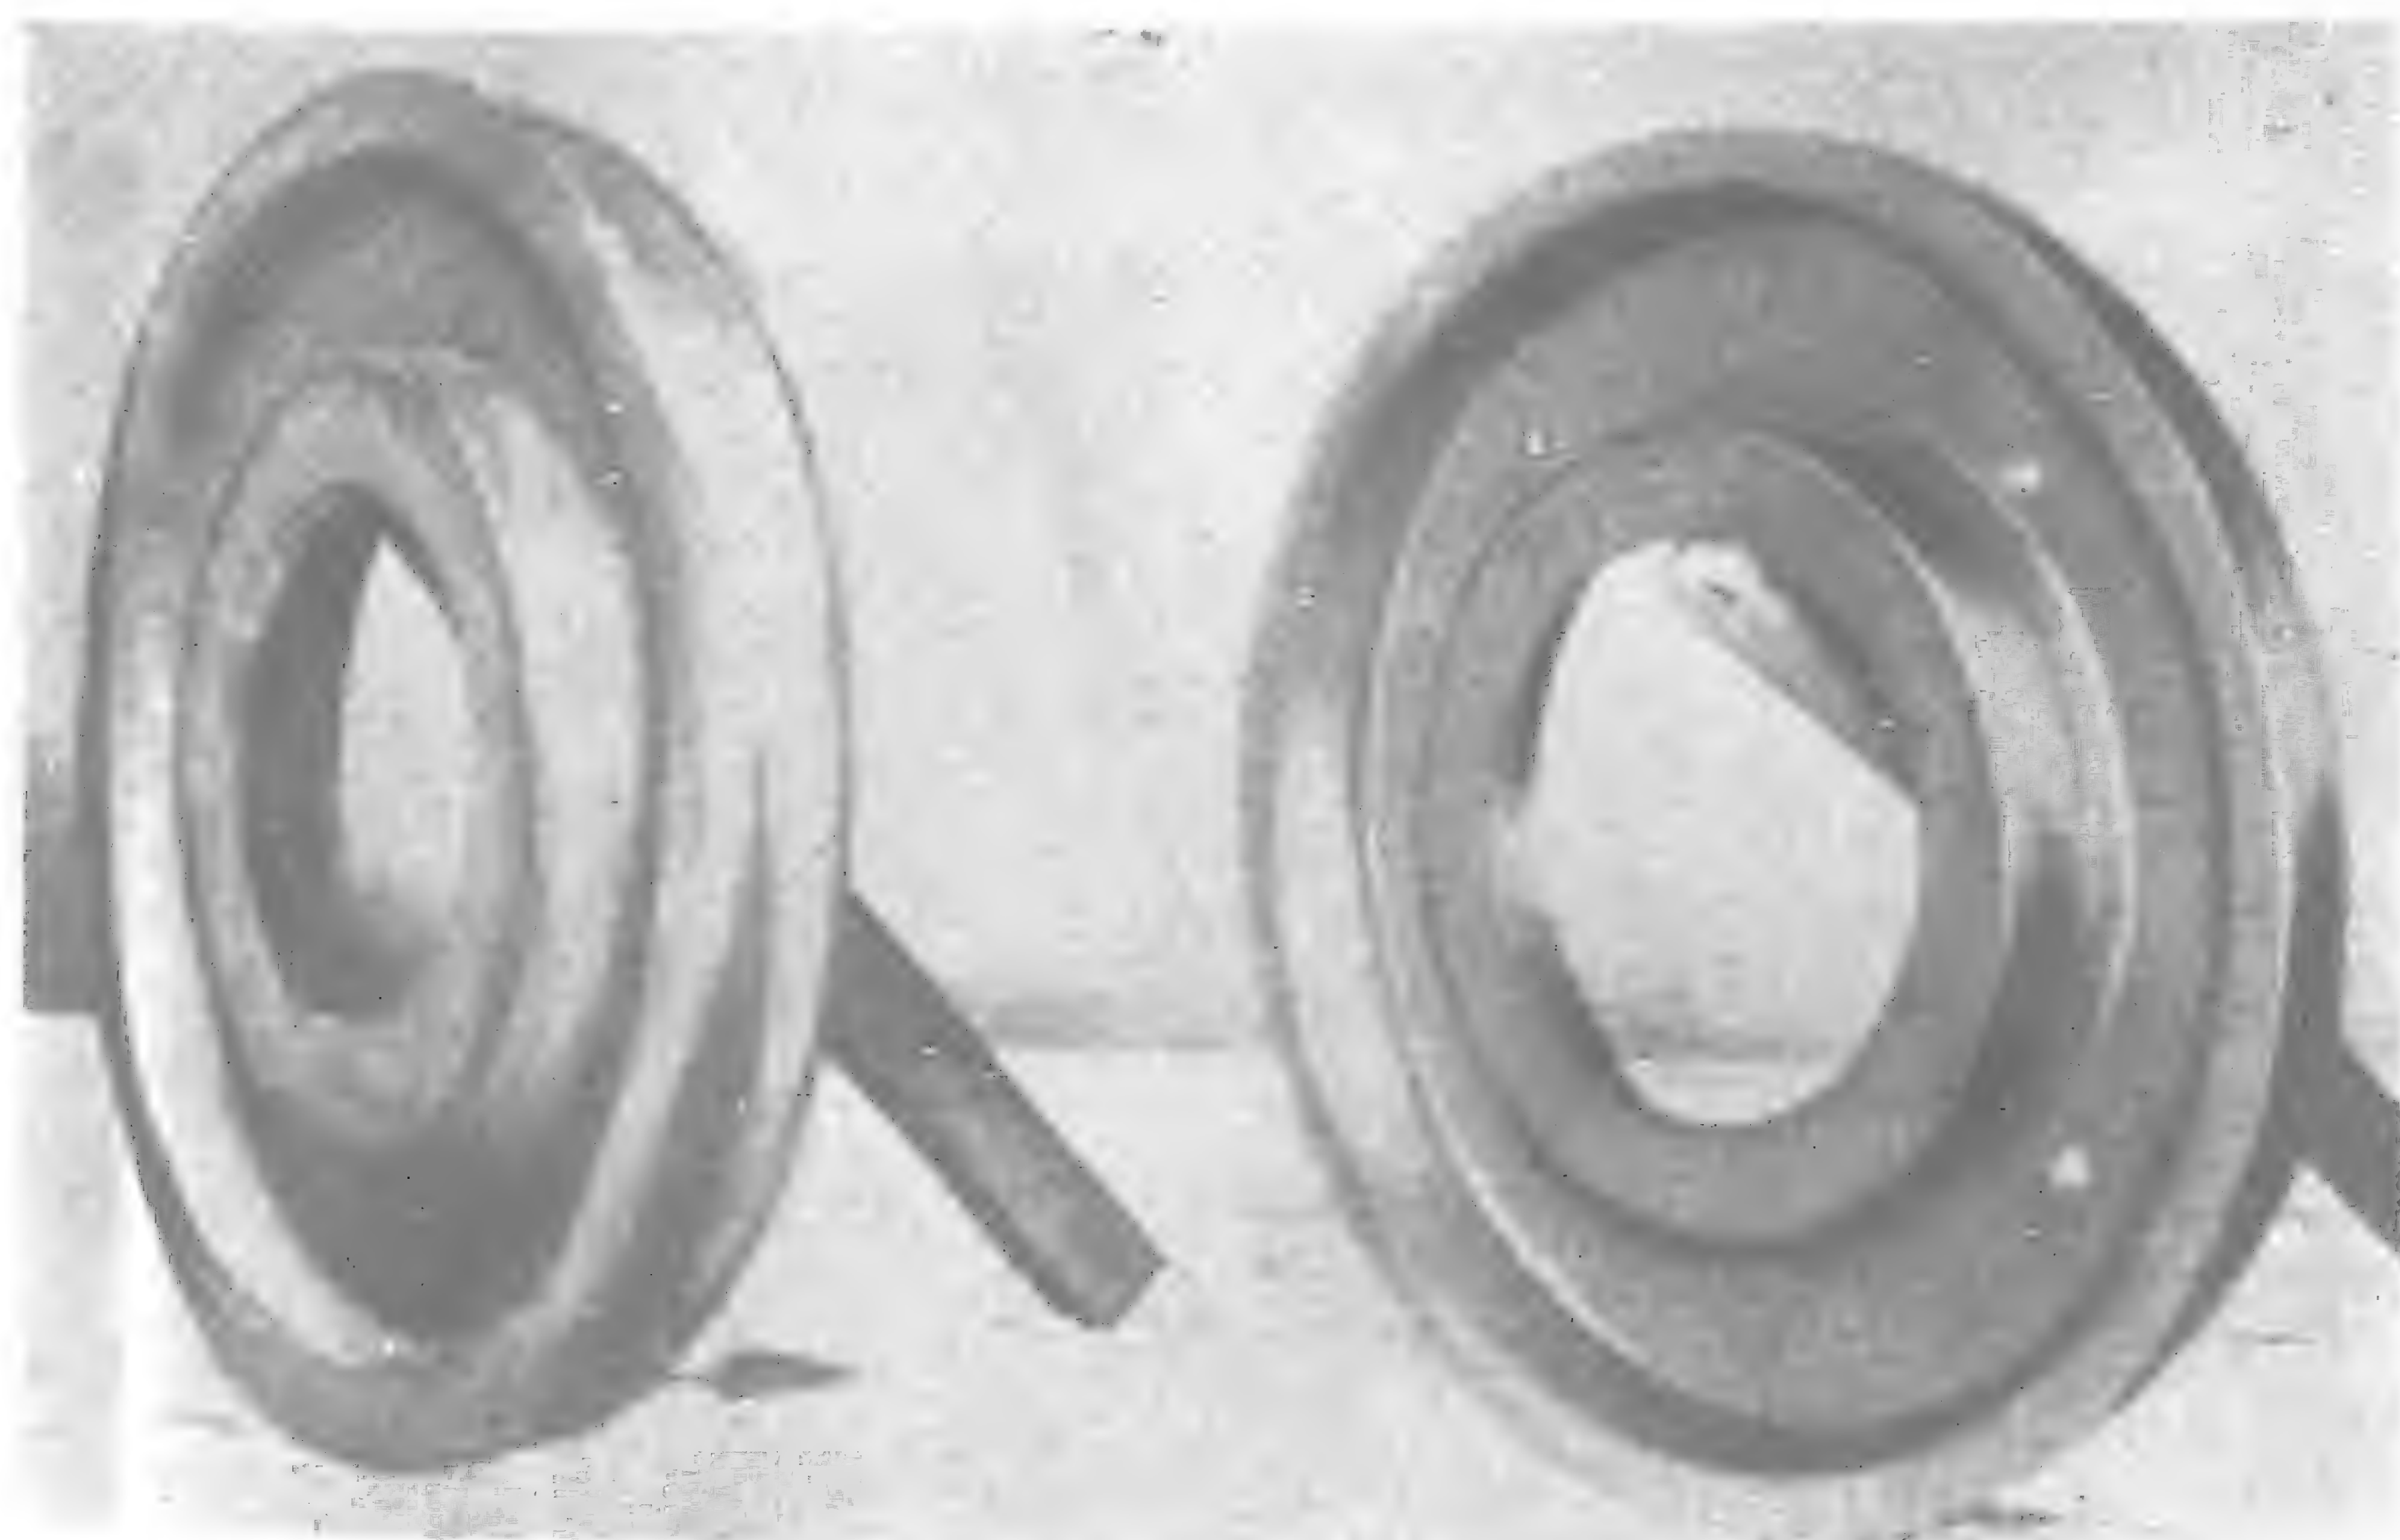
Floating Ring (rough forging and machined) as used on H.S.B. Air Compressor and Superhaul
